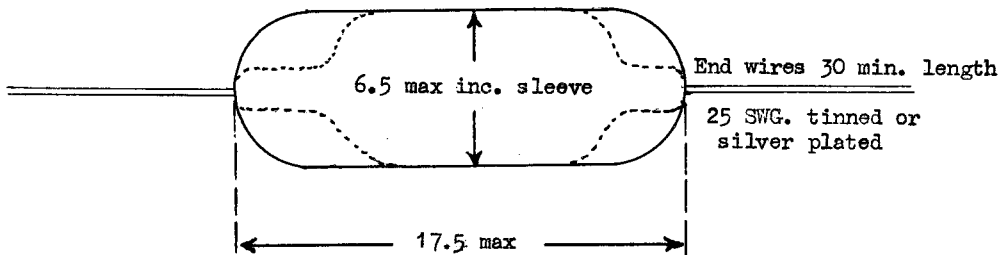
DIMENSIONAL OUTLINE DRAWING
